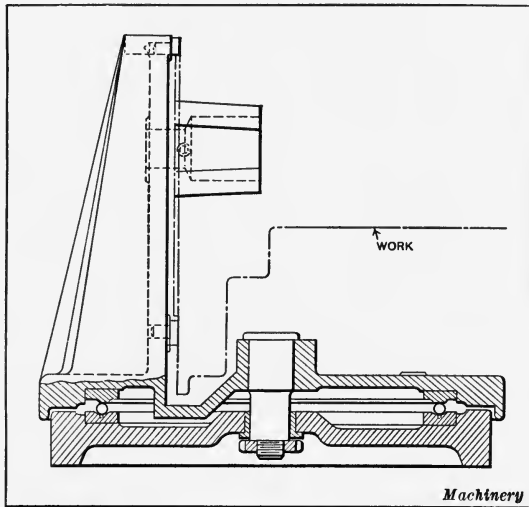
Pivoted Ball-bearing Fixture shown in Fig. 41
